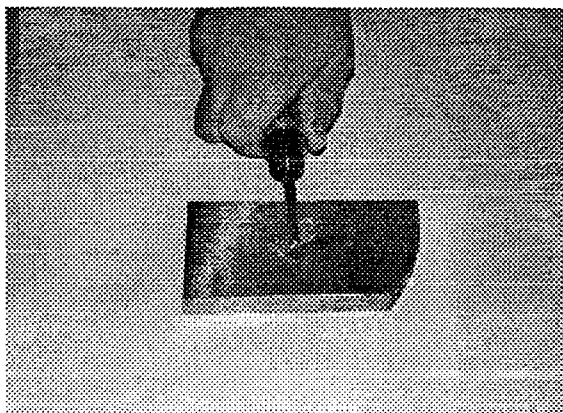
Flapper peen tool (electric grinder shown) held in position for peening.
